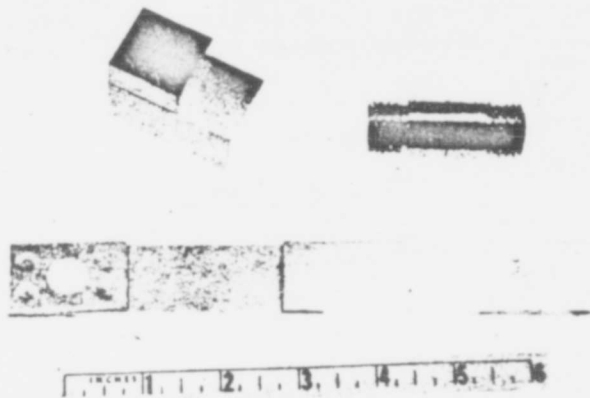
Lap-Shear, Butt-Tensile and Impact Specimens Utilized in REA 111-9106
